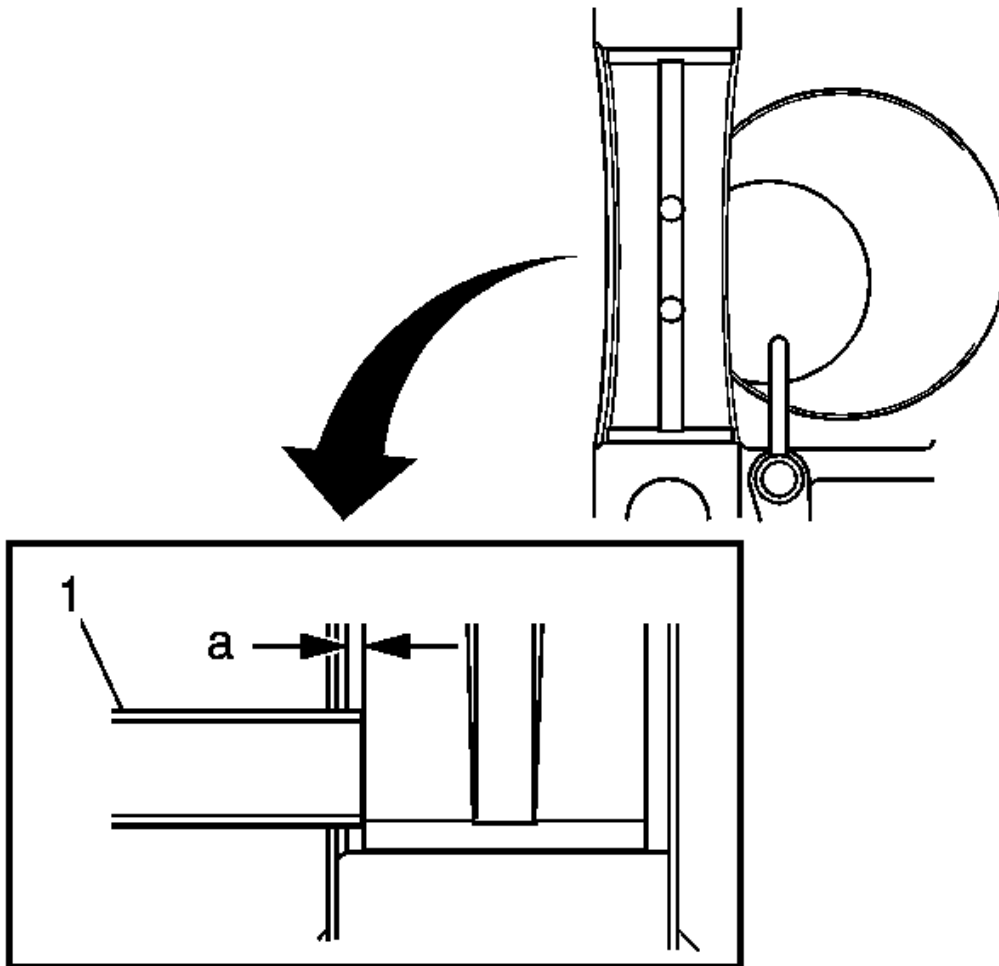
View Of Upper Bearing Installation (Except No. 3 Journal)
